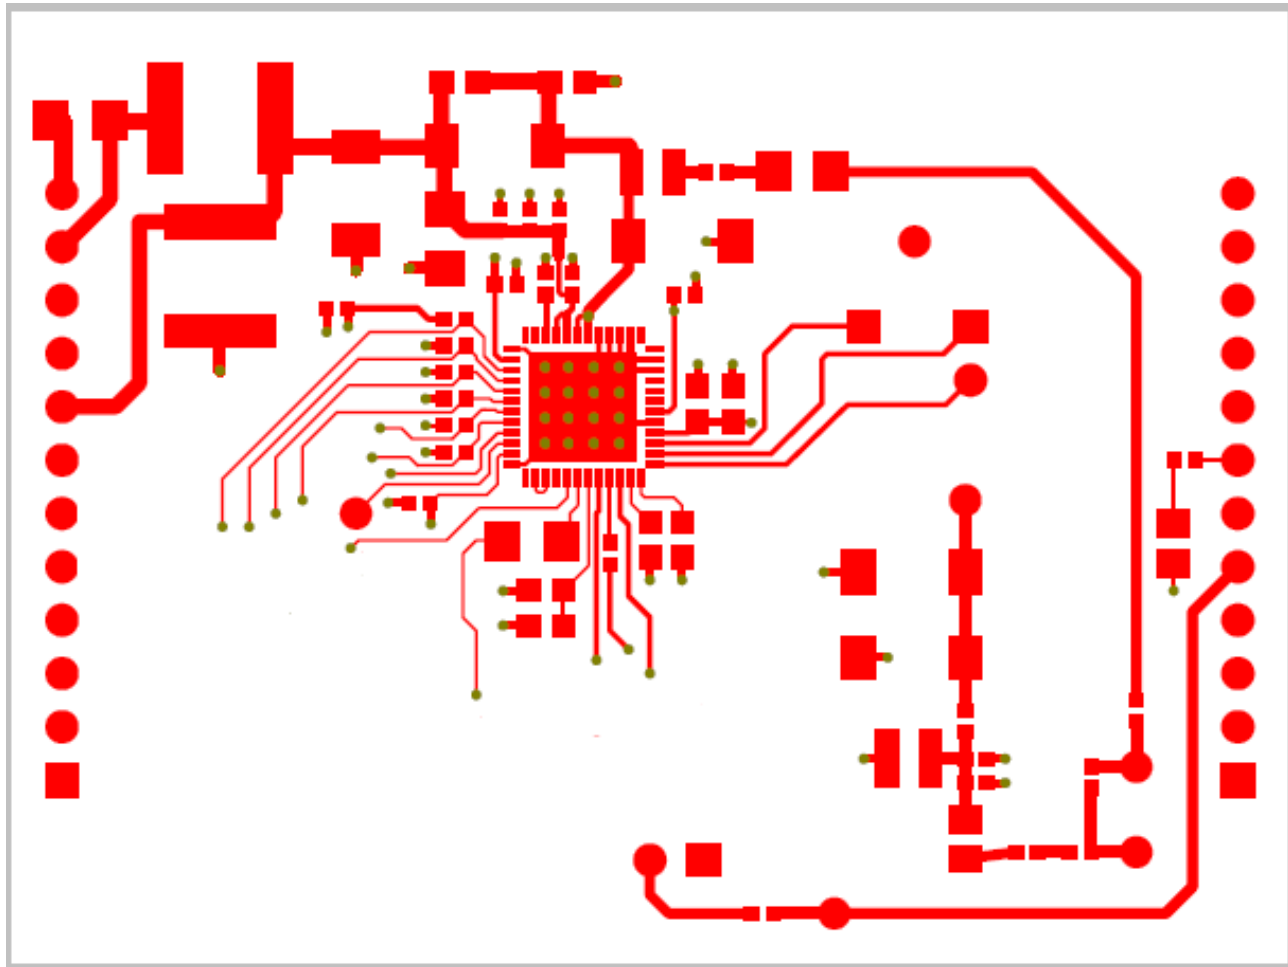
Top Side of PCB Layout used in TMDSPCKIT-V3 PLC Evaluation Kit
